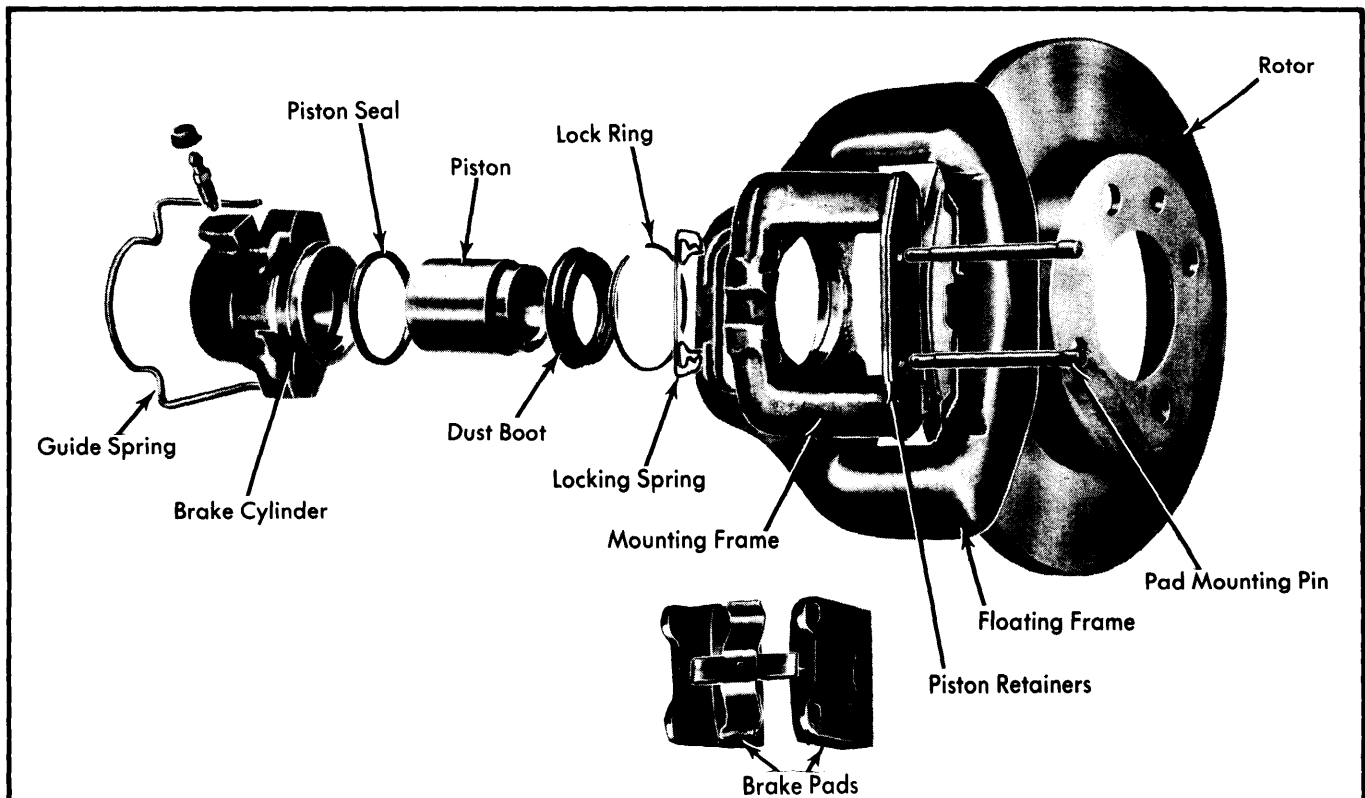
ATE Disc Brake Assembly Used on Dasher, Rabbit and Scirocco
